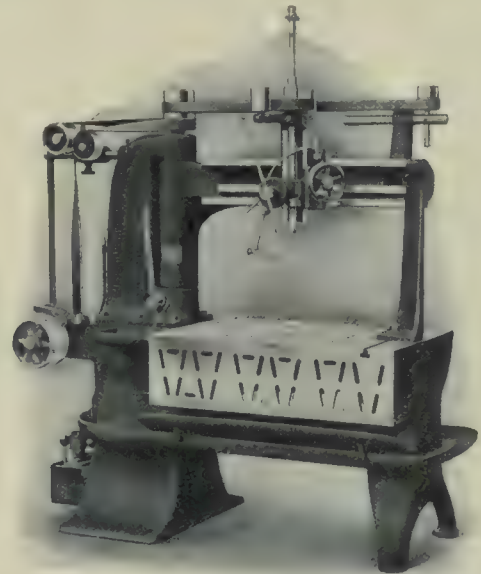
Ball Bearing Radical Radial Drilling Machine.
